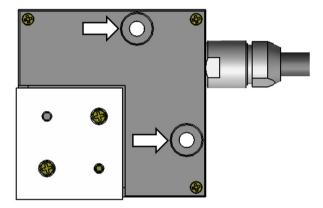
Countersunk holes, Ø 3.2 mm / Ø 6.5 mm for mounting the P-616
